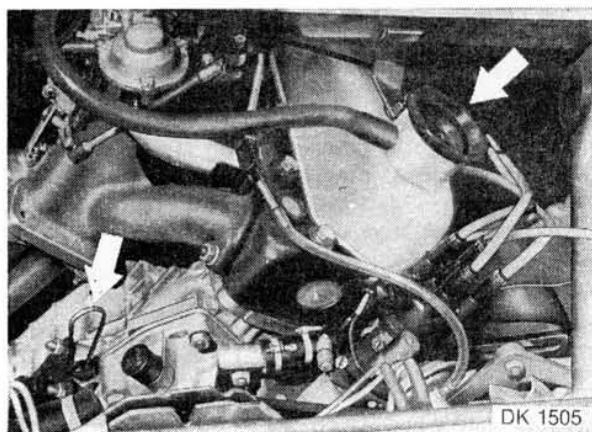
/1 - Oil Dipstick and Oil Filling Hole Plug
